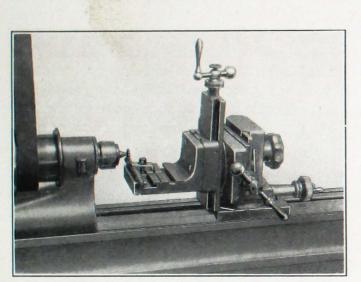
Milling Attachment with Angle Iron set as plain miller to mill keyway in shaft.
